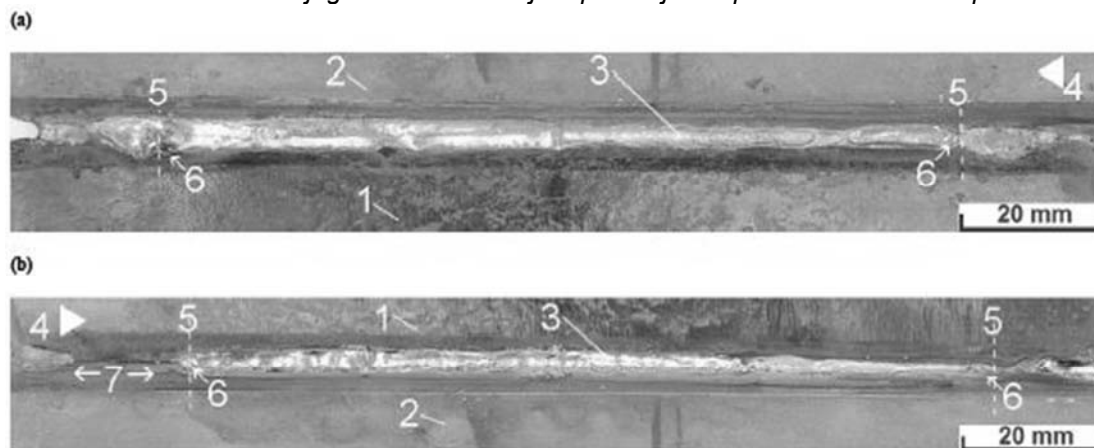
Outer appearance of root layer of GMA welded rail foot after parameter optimization. (a) bottom view 1st pass (b)... bottom view 2nd pass. 1...rail foot 2... weld pool backing strip 3... Weld root 4... Welding direction 5... Sidewise run-in and run-out delimitation lines 6... TIG weld spot for fixation 7...no root
